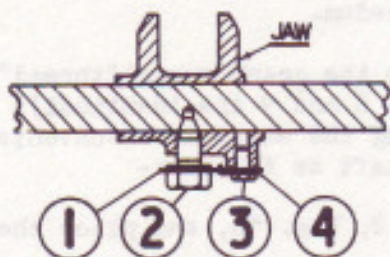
SELECTOR JAW - METHOD OF LOCKING.
